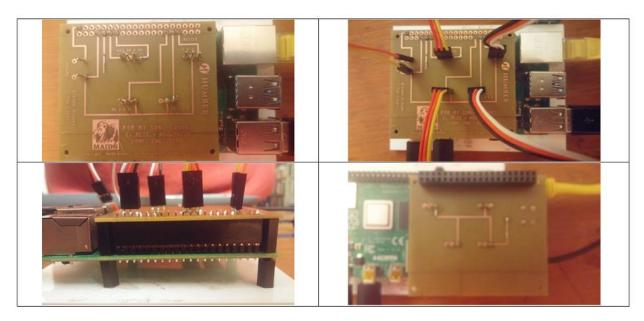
PCB BOARD BOTTOM AND TOP LAYERS.
